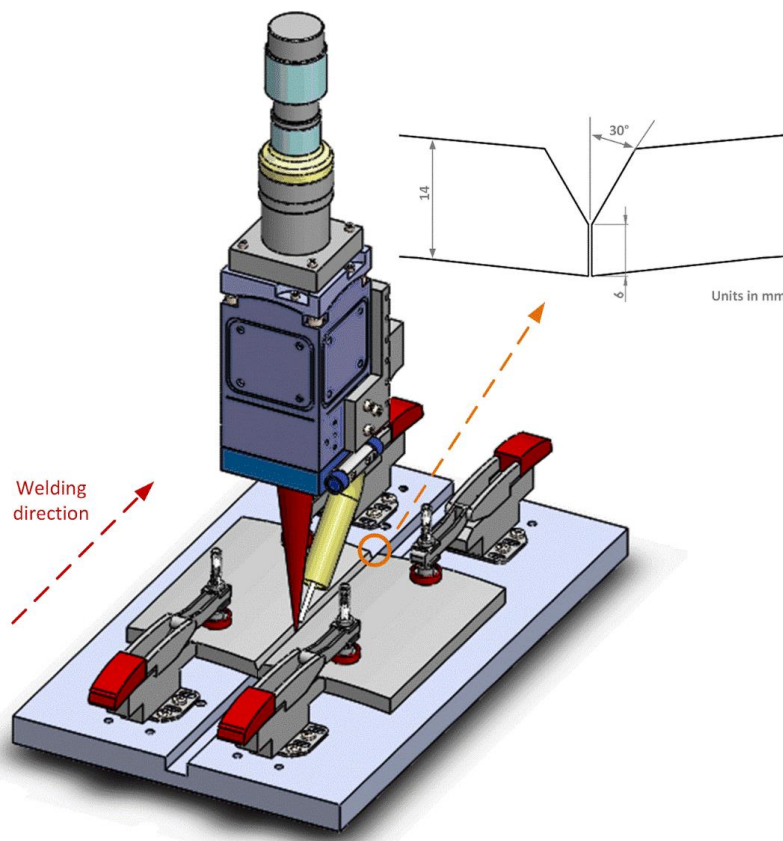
Laser welding experimental set-up with wire feed.
